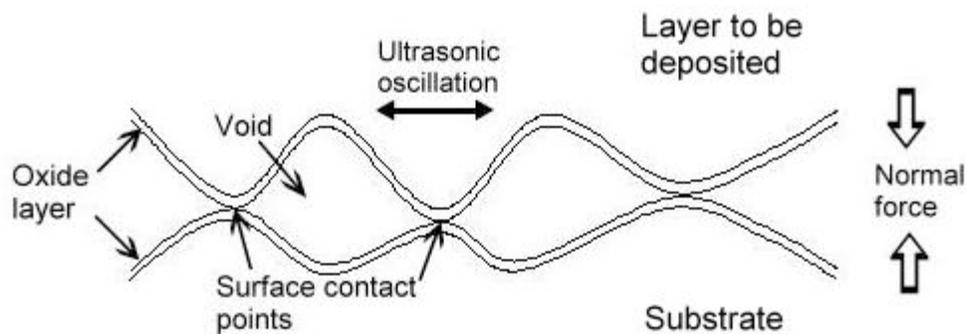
Schematic of the mating surfaces at the beginning of ultrasonic welding.
